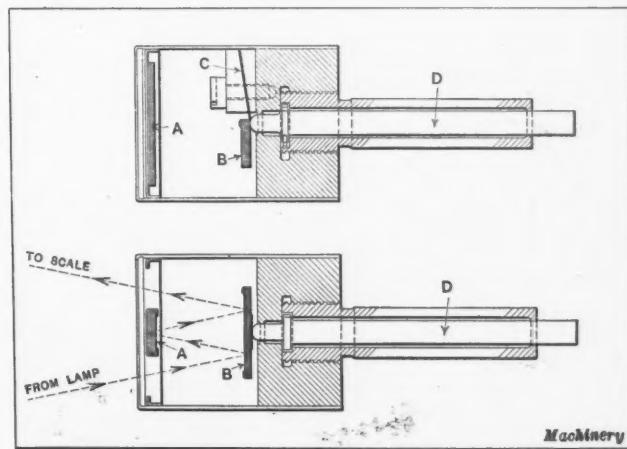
Optical System used on Machine of the Bench Micrometer Type
